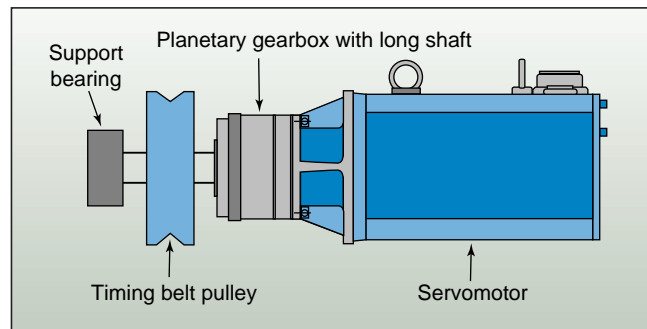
Outboard support bearing on a long output shaft enables the planetary gearbox to handle high overhung loads caused by a pretensioned belt.
